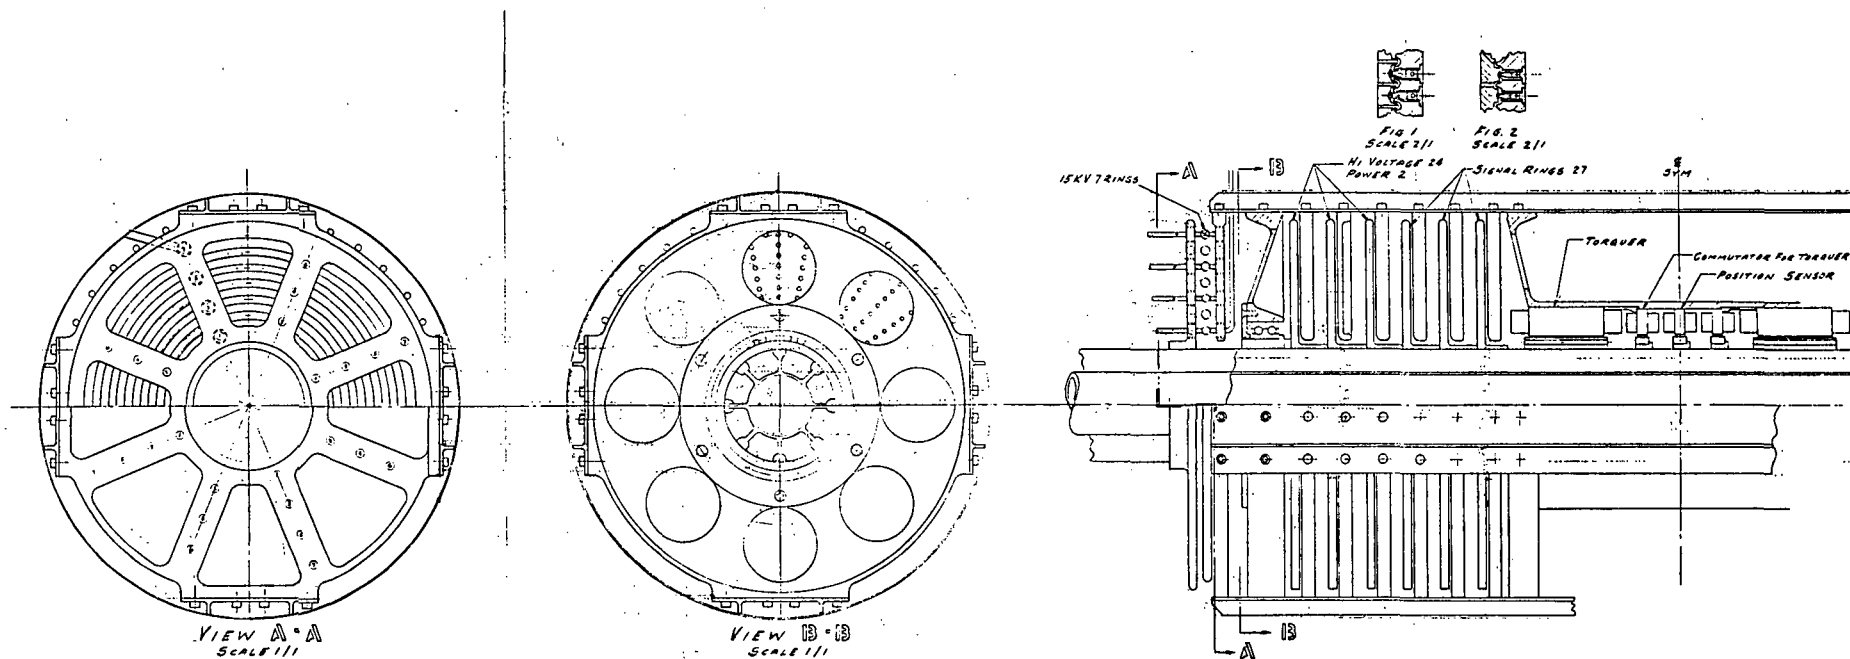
Rail Type Assembly with Liquid Metal Brush Slip Rings
